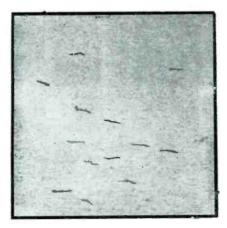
Macroetch section of a forging, showing defects originally found by supersonic testing
